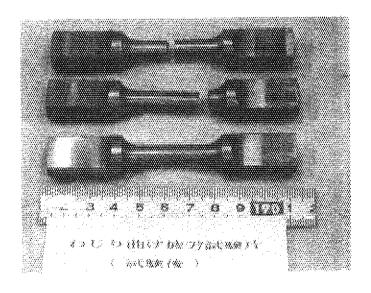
Appearance of specimen after torsion fatigue test(Nb1%Zr/SS304 joint).
